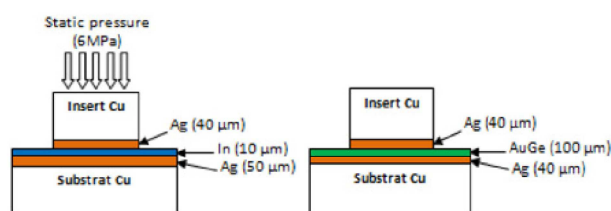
Multilayer structure of the two assemblies tests, (a) TLPB Ag-In, (b) AuGe.
